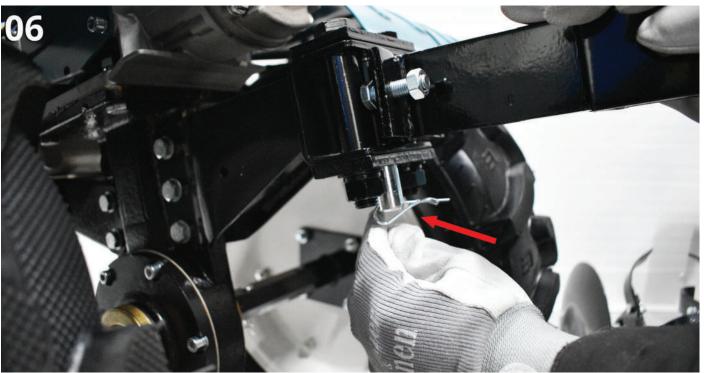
Install and secure the plow holder with the locking pin and cotter pin.
